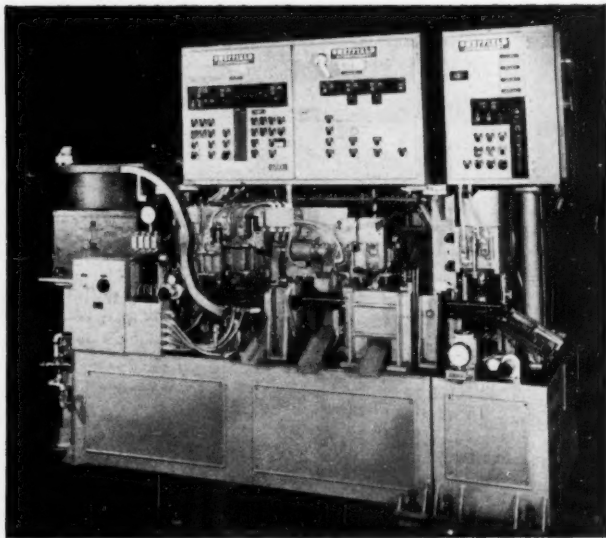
Sheffield Automatic Assembly and Inspection Machine for Taper Roller Bearings
